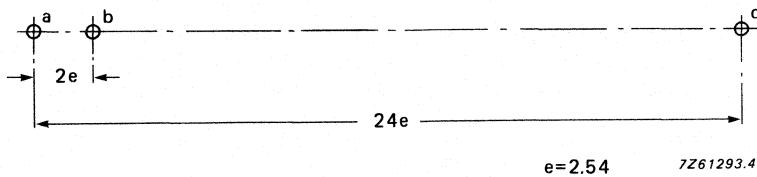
Hole pattern in printed-wiring board (viewed on component side).
